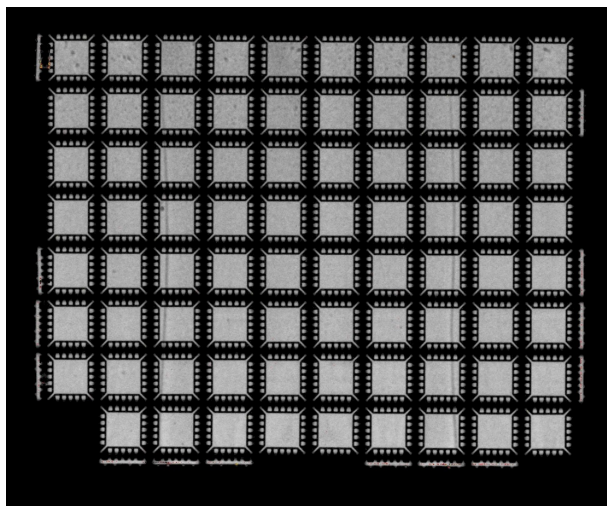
CSAM of flank plated molded parts after solder shock showing no delam areas in 80 unit array.
